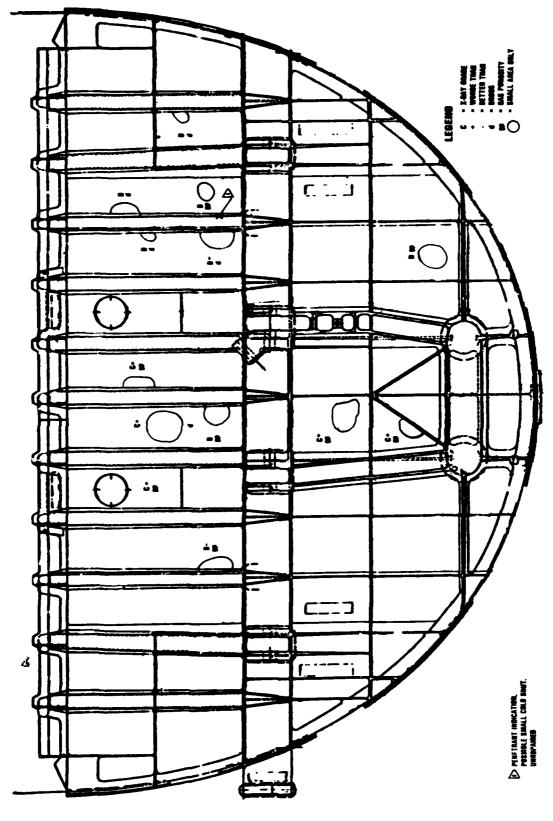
Radiographic and Penetrant Inspection Results - Bulkhead Casting M04
